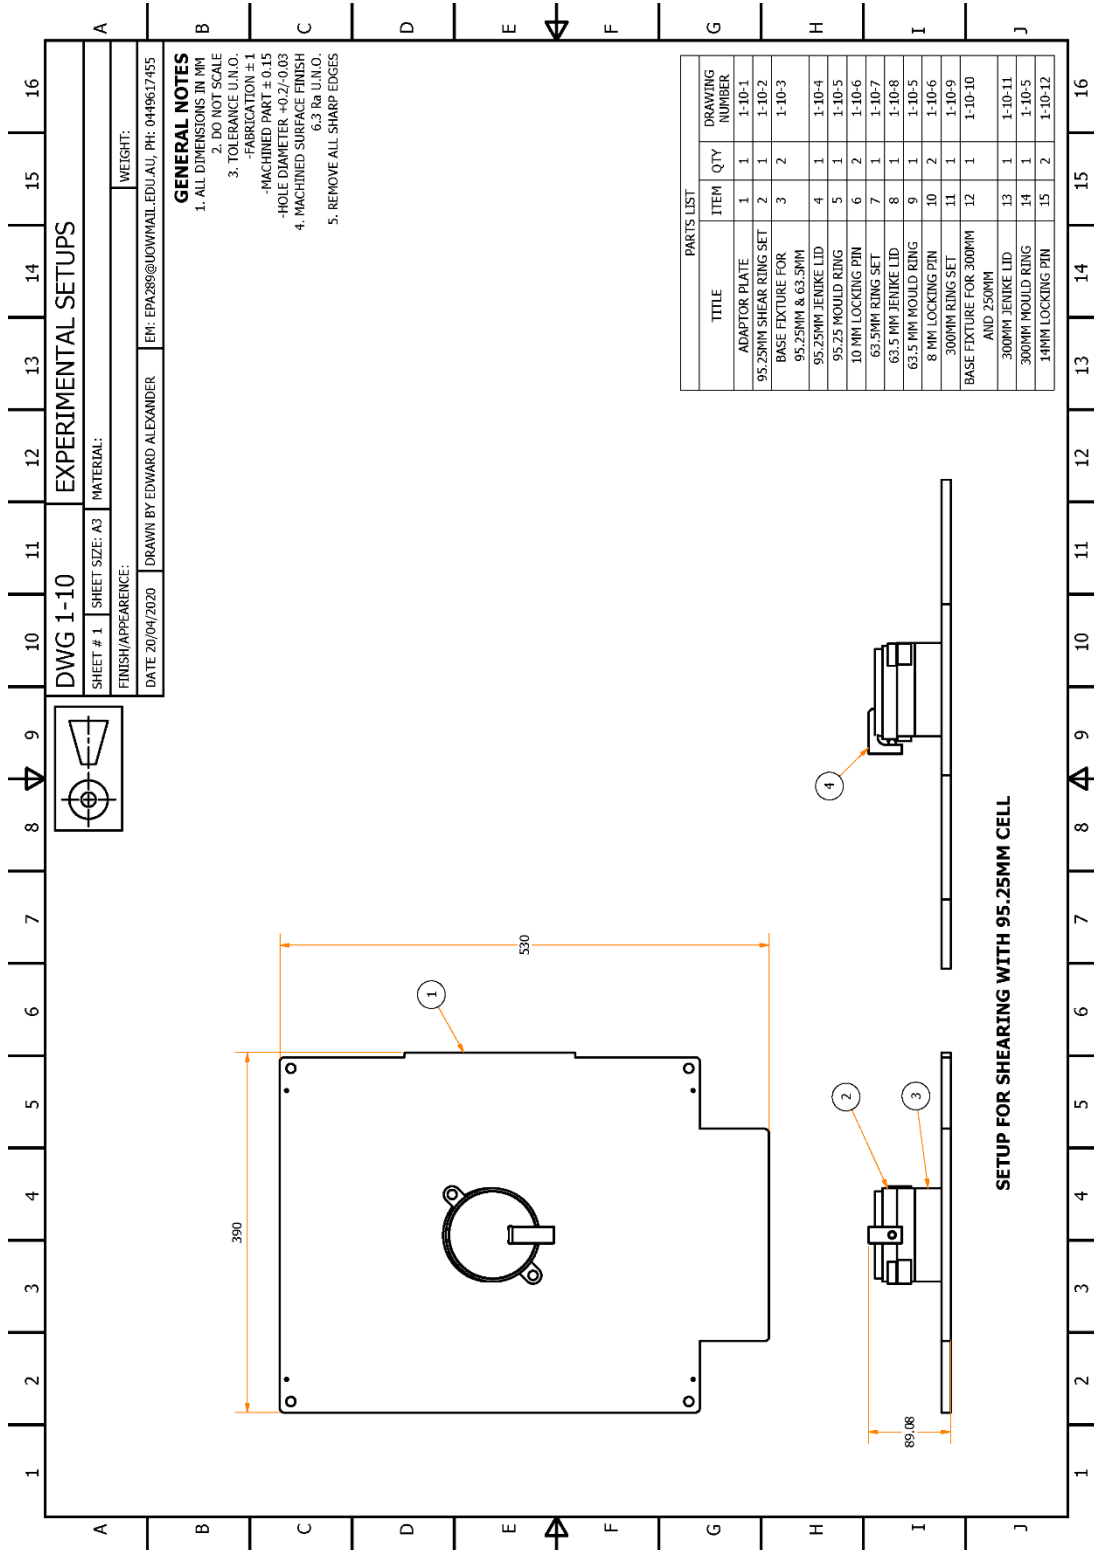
Drawing of set-up for shearing with 95.25 mm ID cell
